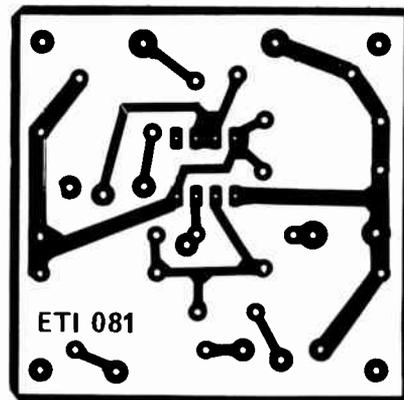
Printed circuit layout. Full size 50 mm x 50 mm.
